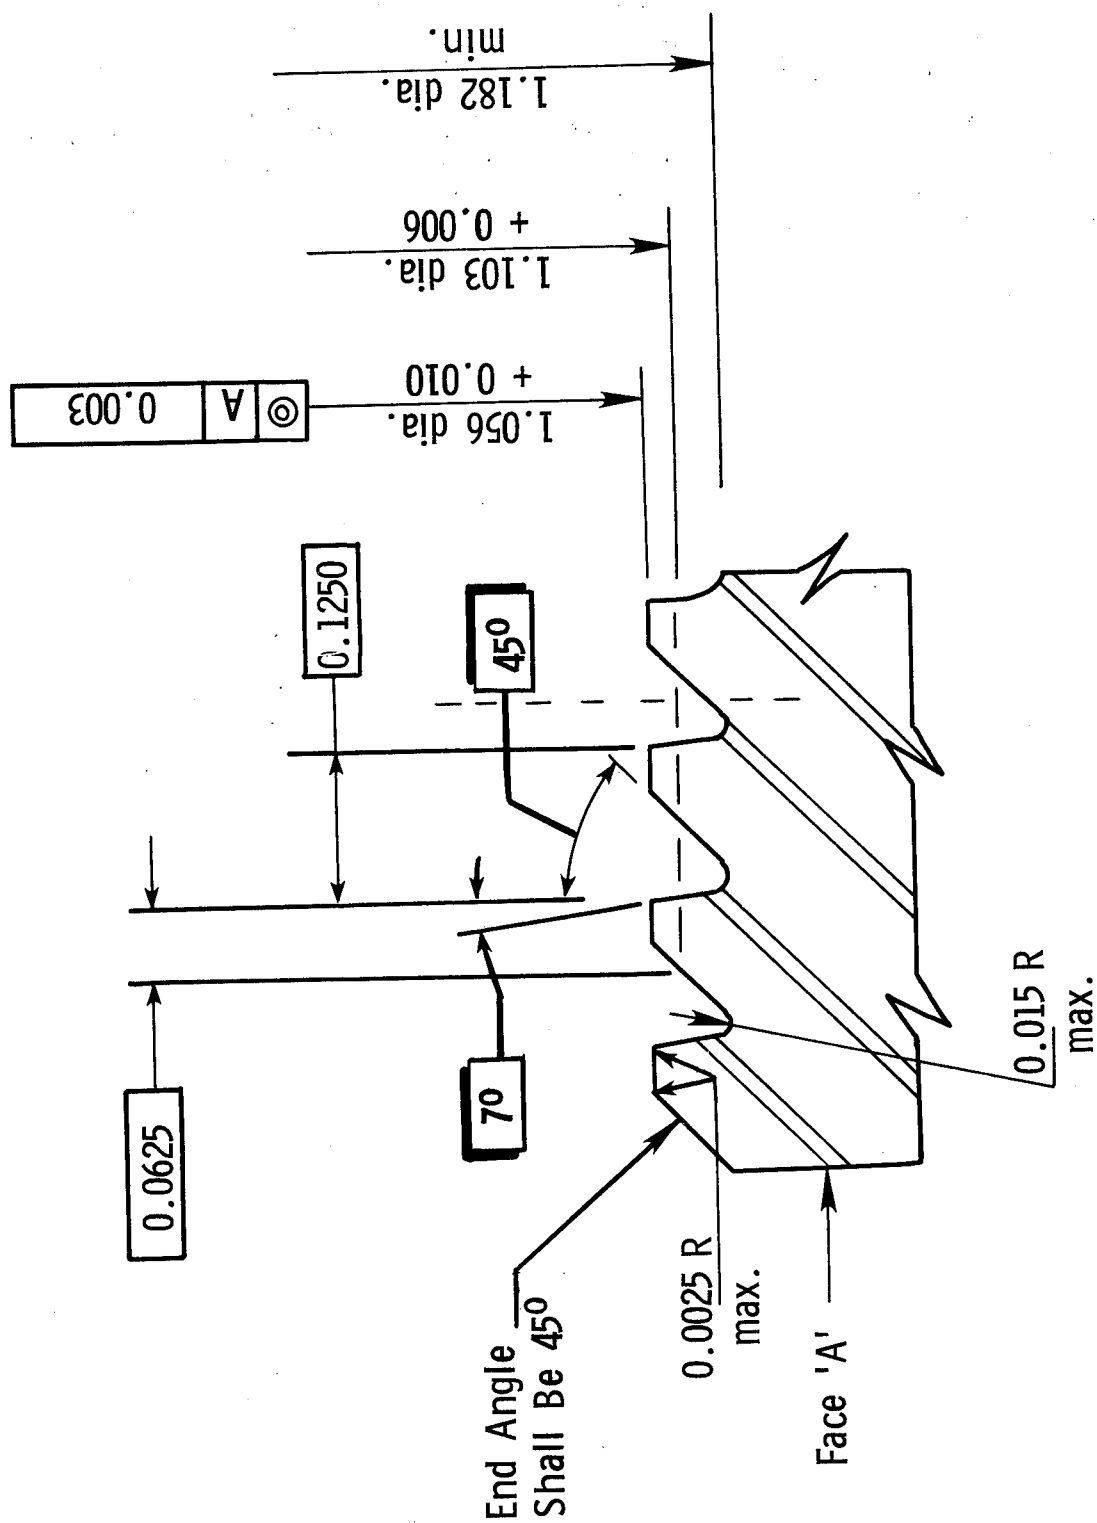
COMPOSITE SABOT (M774) LUG AND GROOVE DIMENSIONS
